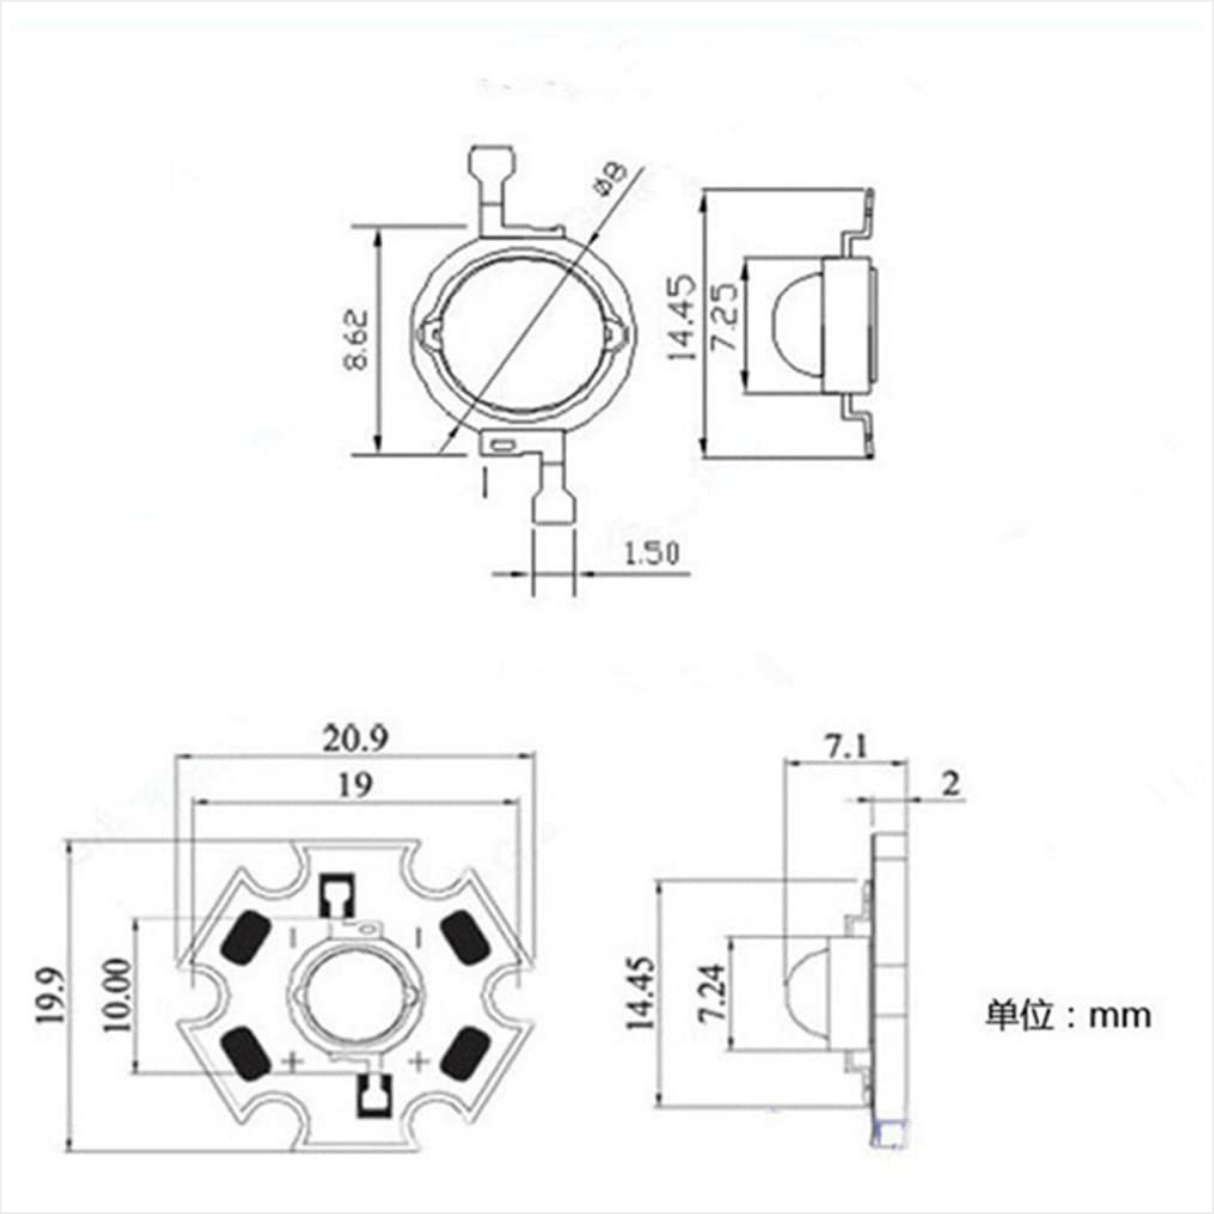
Dimensions of the 3W UV LED Chip and PCB.
